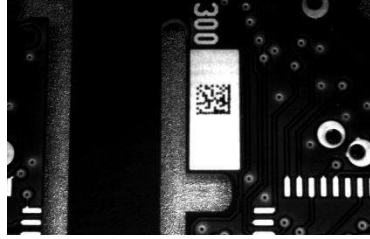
Dot Matrix Code Directly Marked on PCB Copper Pad by Using Ink-Jet Technology
